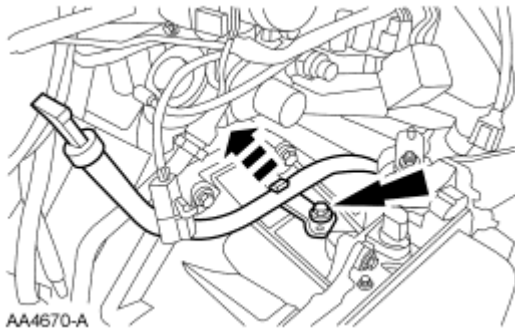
Transaxle Fluid Level Indicator Tube & Bolt
